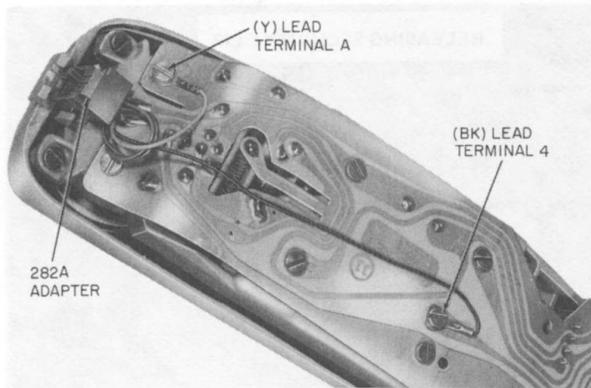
282A Adapter (P/O D-180825 Kit of Parts) Installed in Hand Telephone Set
